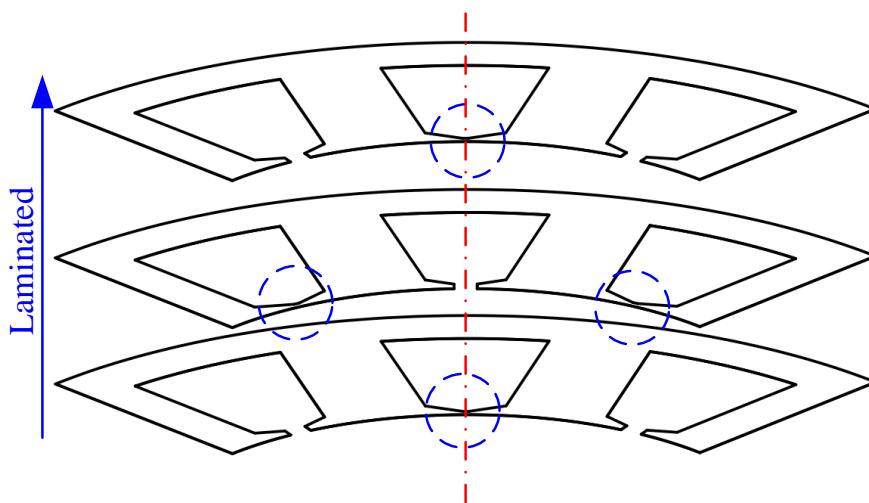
Illustration of alternative closed slot opening techniques (3D drawing) [AZA12a].
